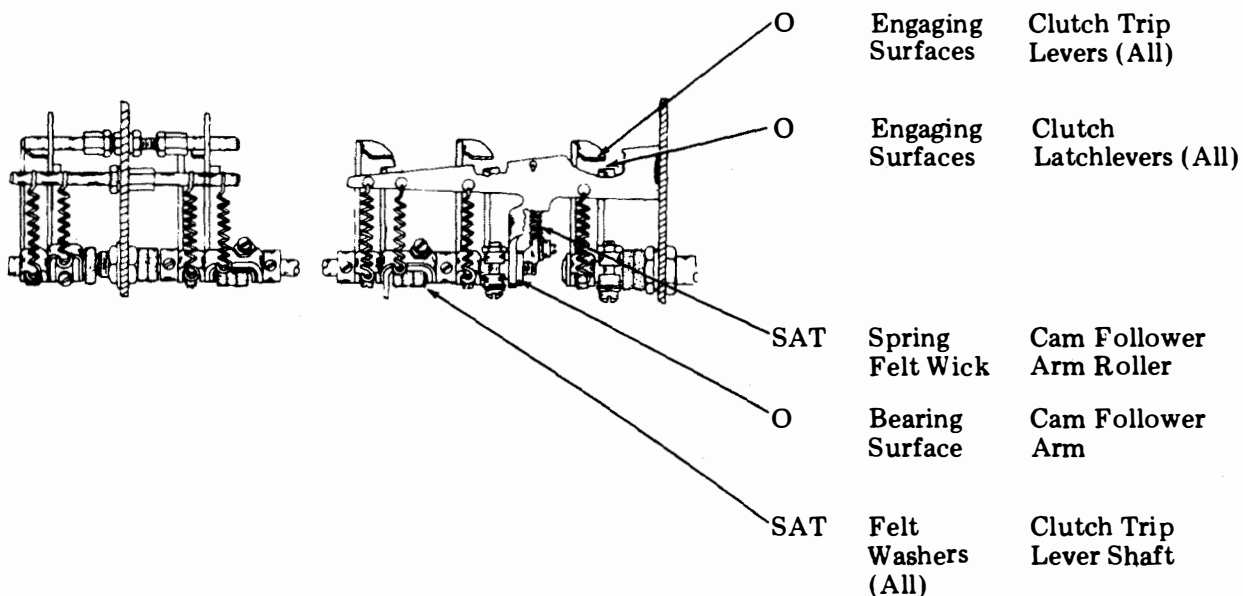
Main Shaft - Clutches and Gears, Rear View
